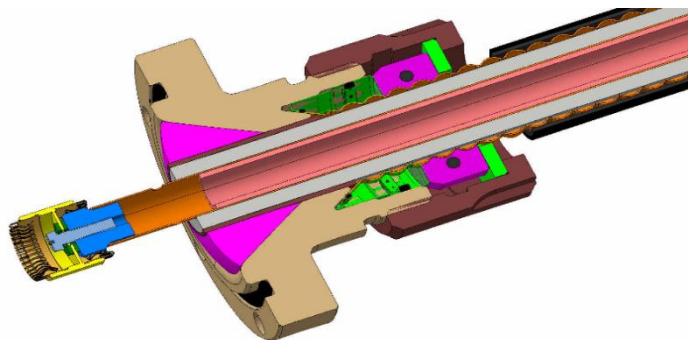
SF₆ gas filled coax cable connector (CAD cross section) [37]
